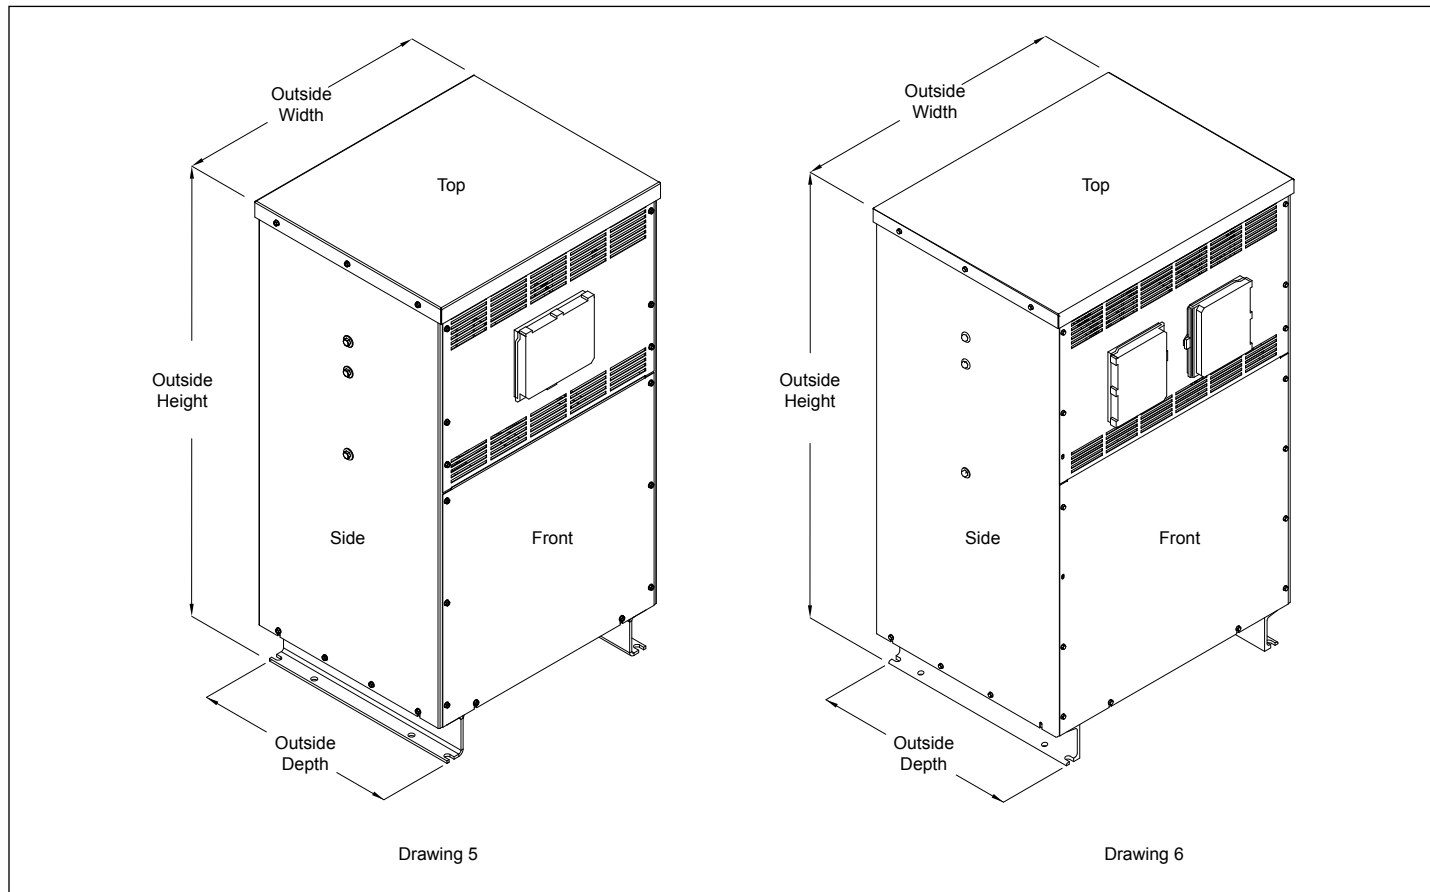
Dimensional Drawings—General Purpose Ventilated Transformers
